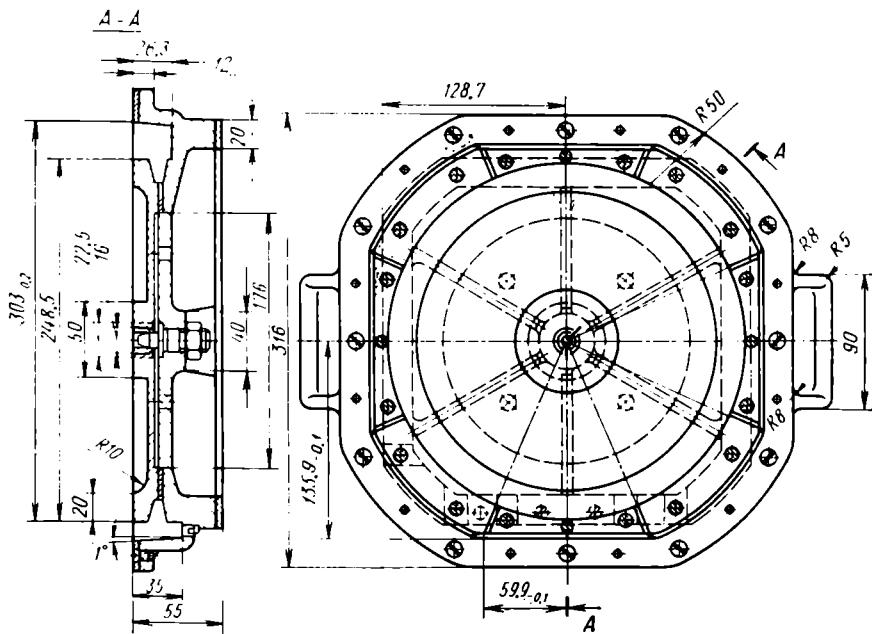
Core box for making the core used to form the groove in the rim of a pulley casting
